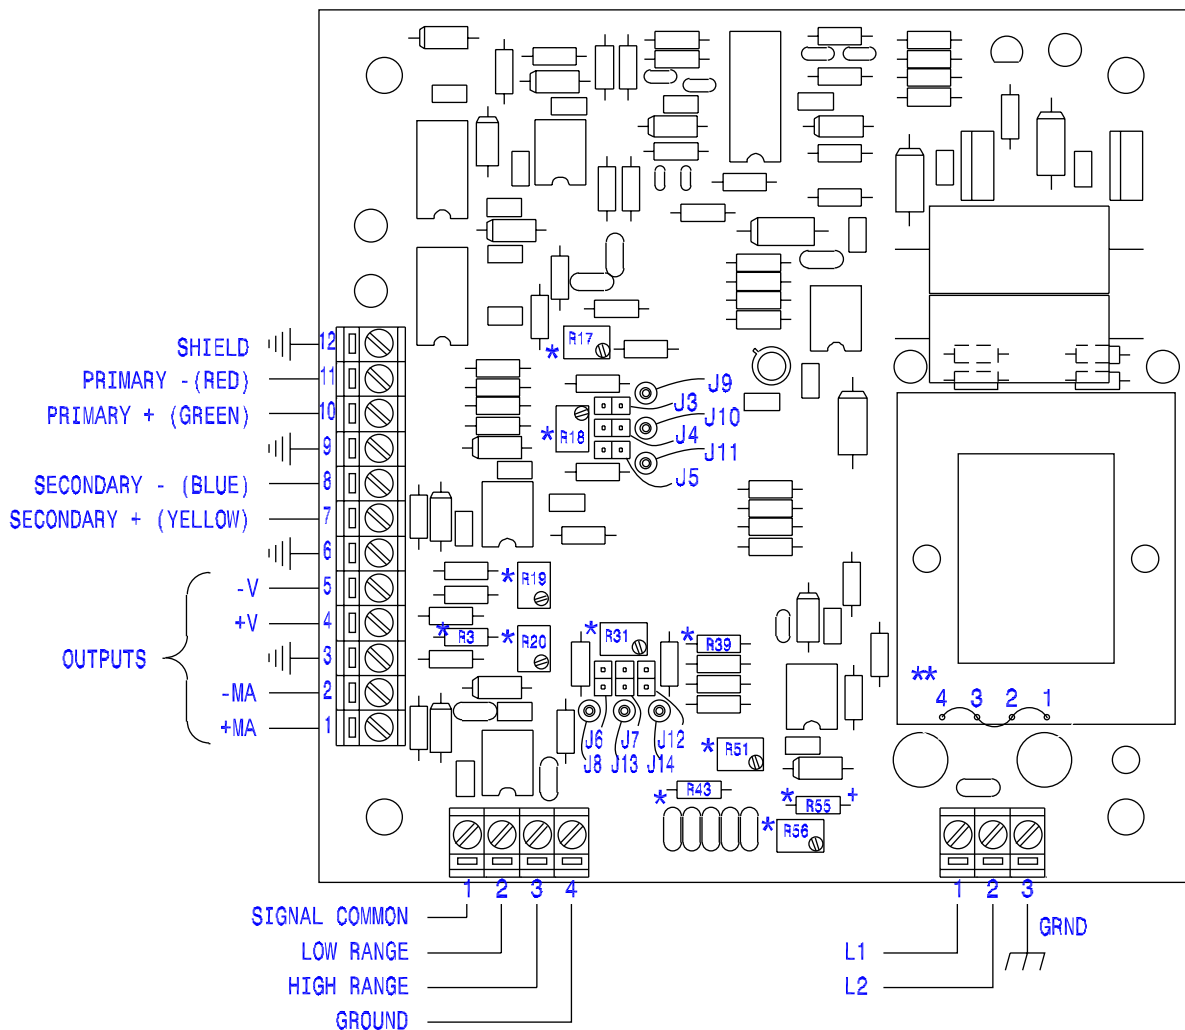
Torque Sensor Electronics Board Adjustment Component Locations
